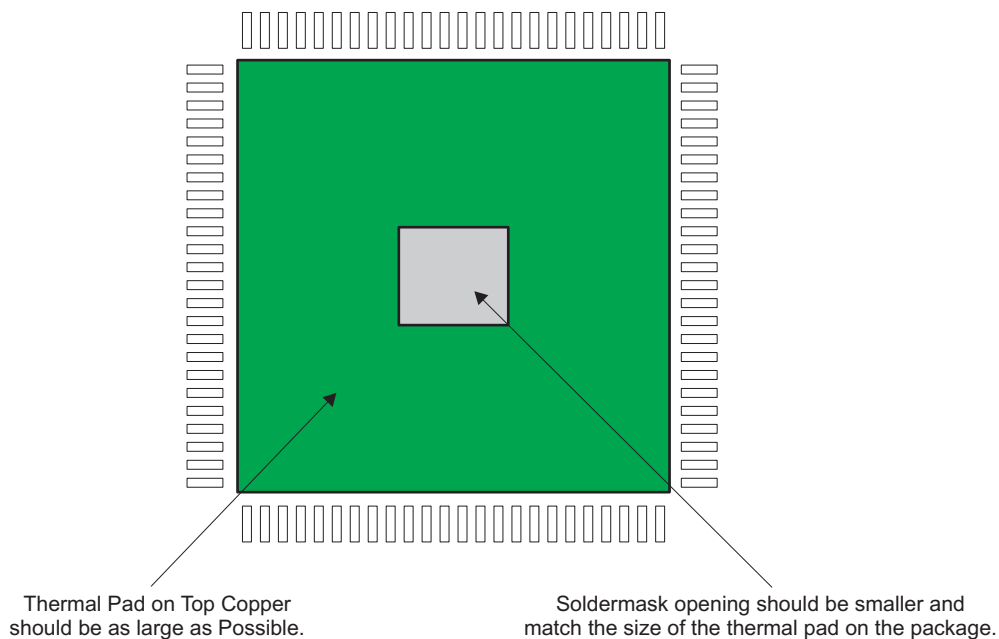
Soldermask Opening Should Match Size of Package Thermal Pad
